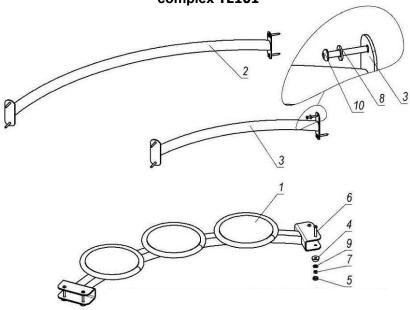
Completeness and assembly scheme of the balcony with a platform for TL101
